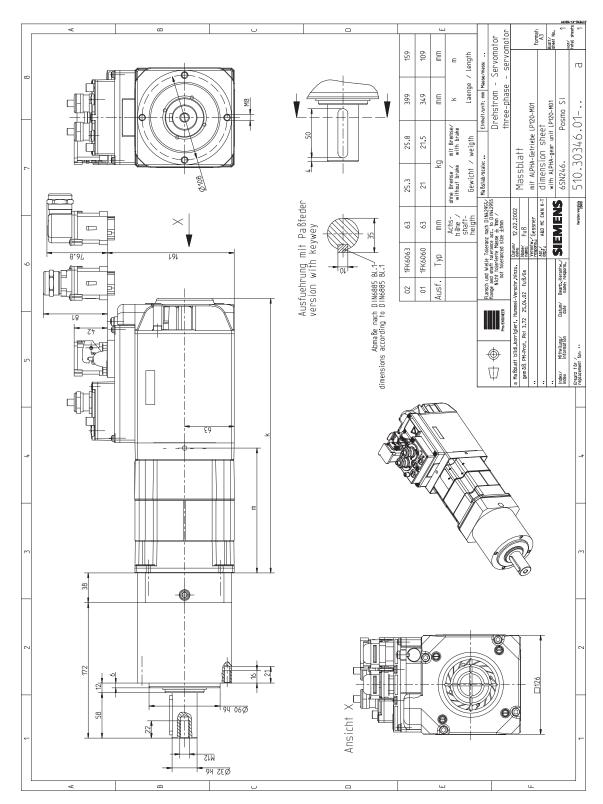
Dimension drawing POSMO SI 6SN246 -2CF00-0G with gearbox LP120-M01
